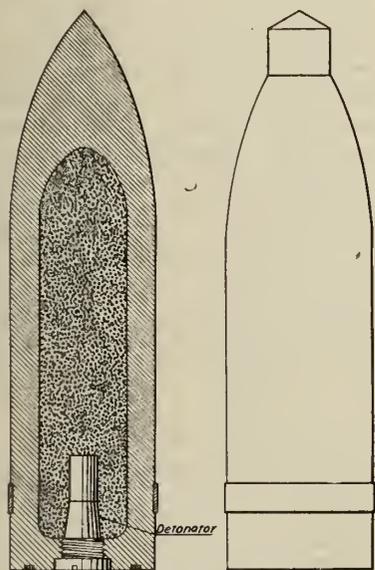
SIMPLEST FORM OF EXPLOSIVE PROJECTILES.
